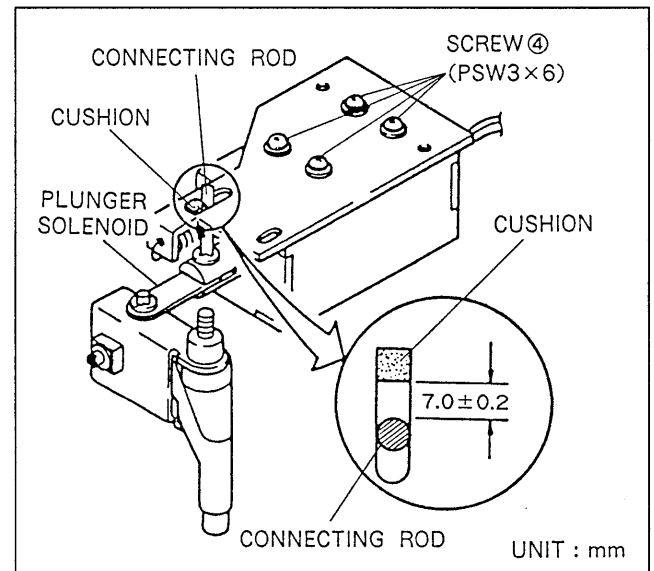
Pinch Roller Solenoid Position Adjustment
